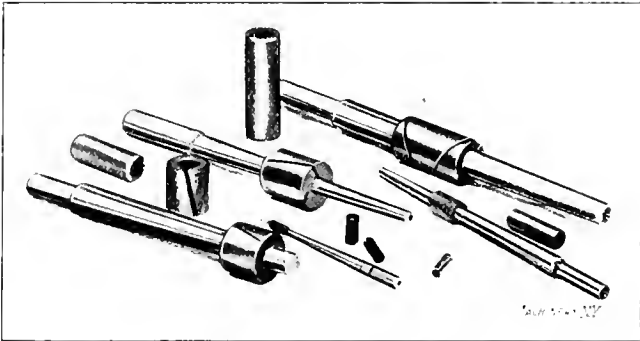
Lap and Lap Arbors used in making Ring Gages
